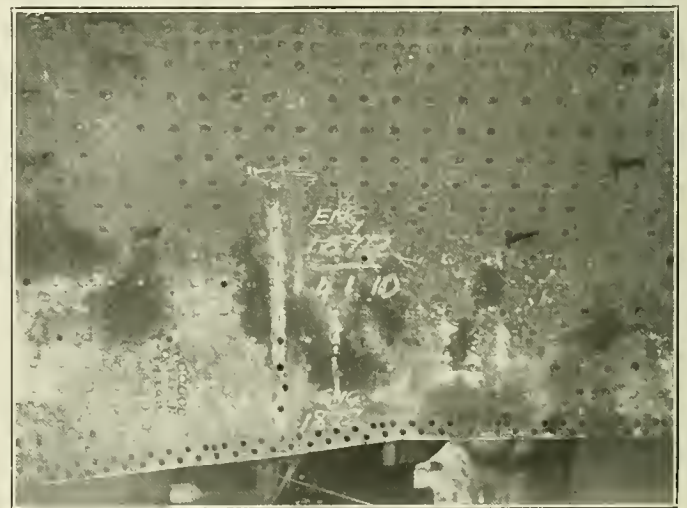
Showing the Staybolt Cracks in the Side Sheets
